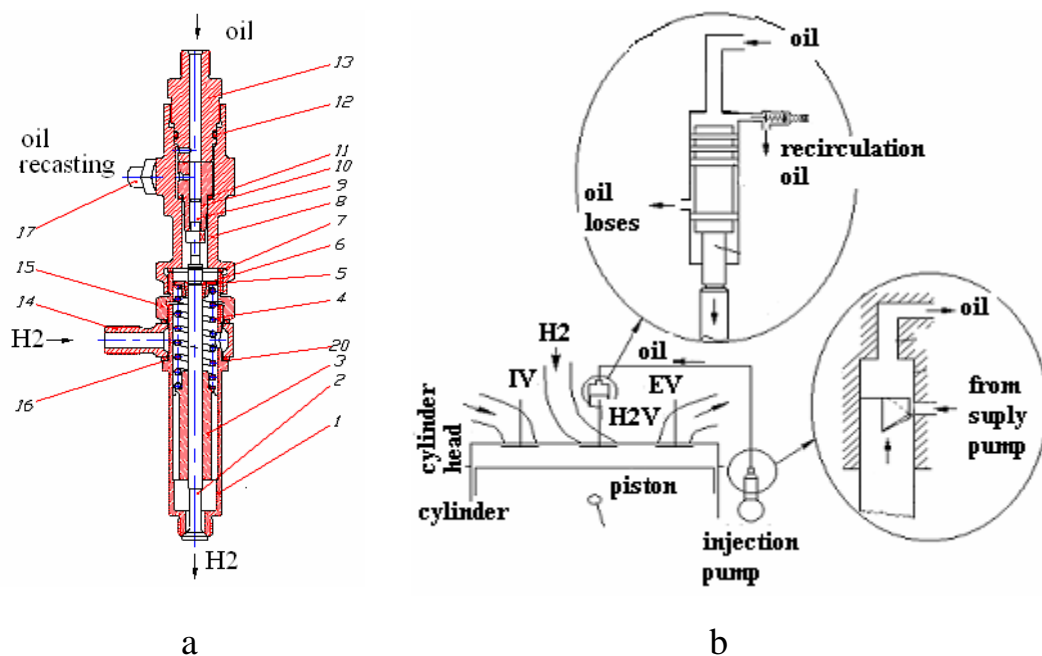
a-Hydrogen valve assembly: 1-inferior housing; 2- hydrogen valve; 3- perforated dish; 4- valve spring; 5- dish; 6-ring; 7- gasket; 8- superior housing; 9- actuator piston; 10- actuator cylinder; 11- gasket; 12- Oaring; 13- recasting oil connection pipe; 14- hydrogen fueling joint; 15-threaded sleeve; 16- gasket; 17- one-way valve; b-Hydrogen valve acting schema: IV-intake valve, EV-exhaust valve, H2V-hydrogen valve
